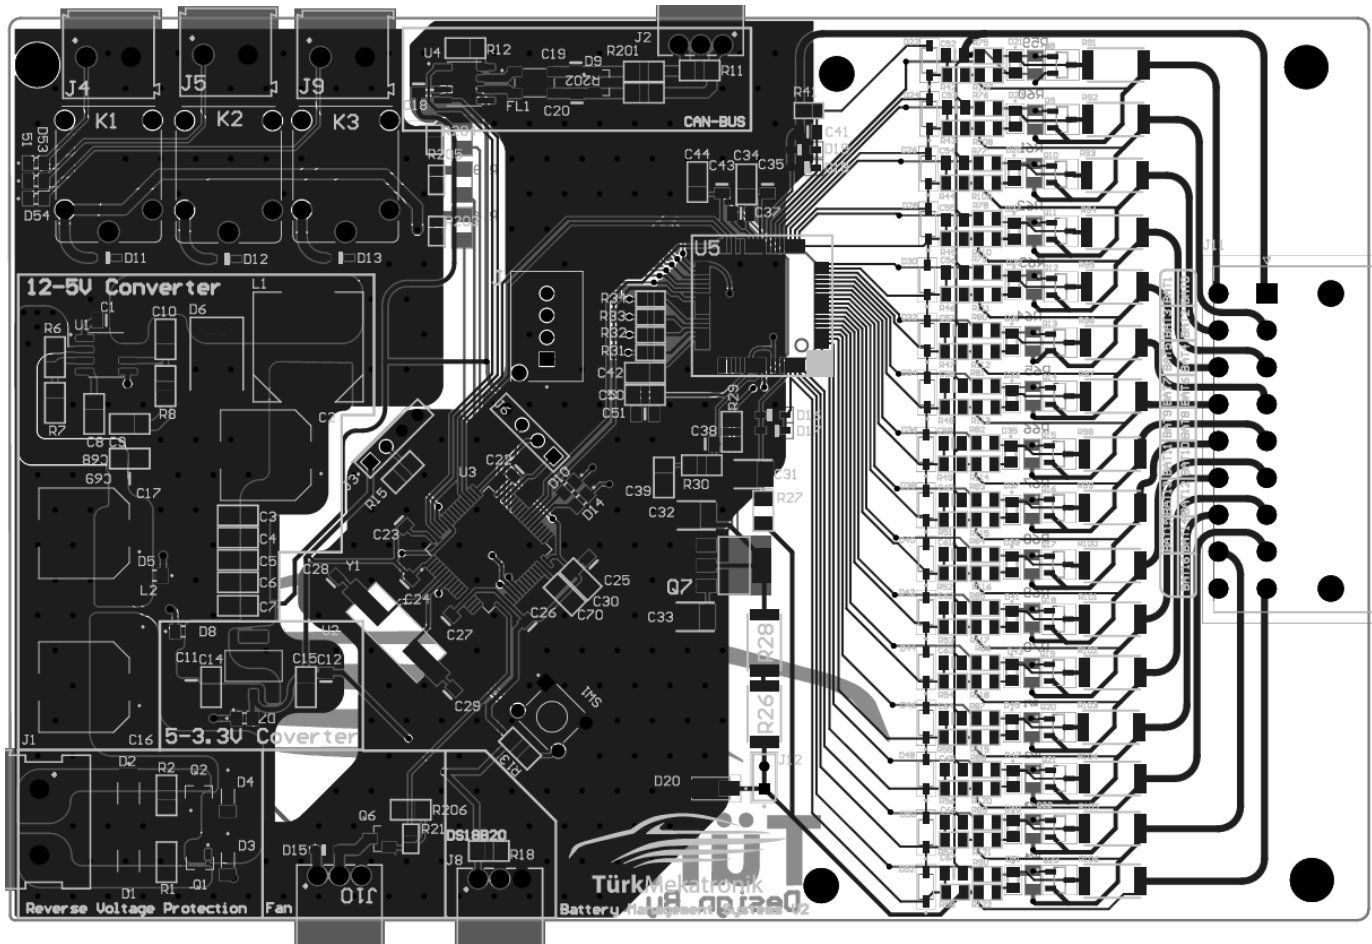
Example circuit PCB designed to read 12 series cell volta
